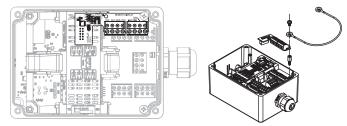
Installed IEF/IEFB adapter PCBA board with tether
